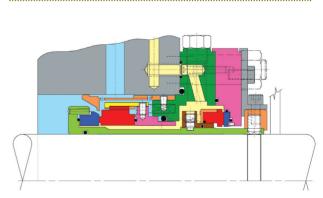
The dual mechanical seal arrangement consists of an HDHW primary seal that handles full system pressure drop and a dry running GSL containment seal.
